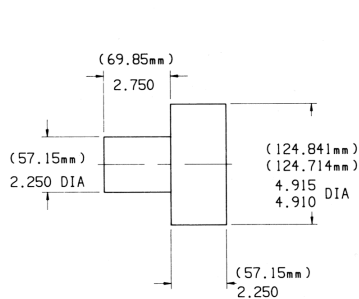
LABYRINTH SEAL INSTALLATION TOOL
